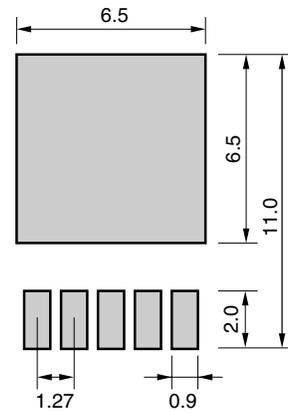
Dimensions of Mount Pad of SC-63
